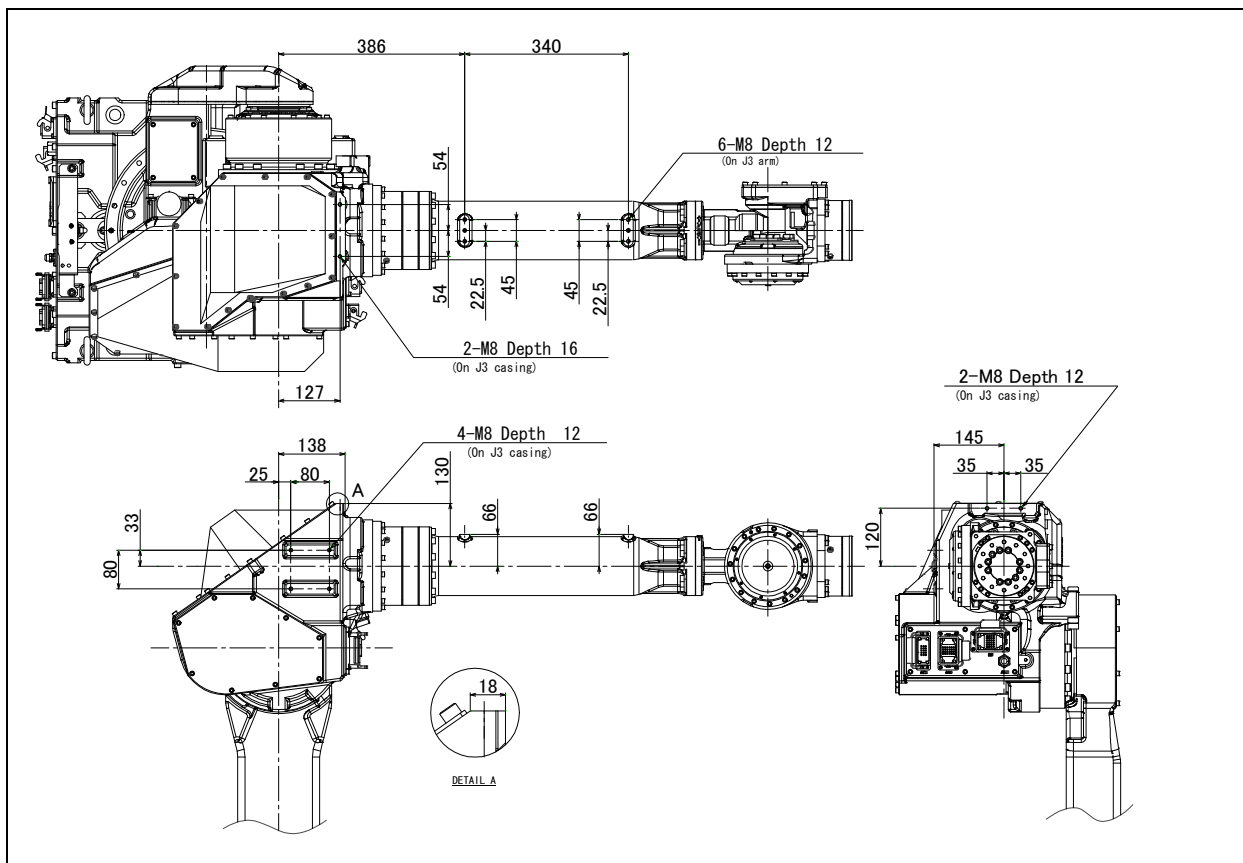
(a) Equipment mounting surfaces (M-710iC/50, /70, /50E)
